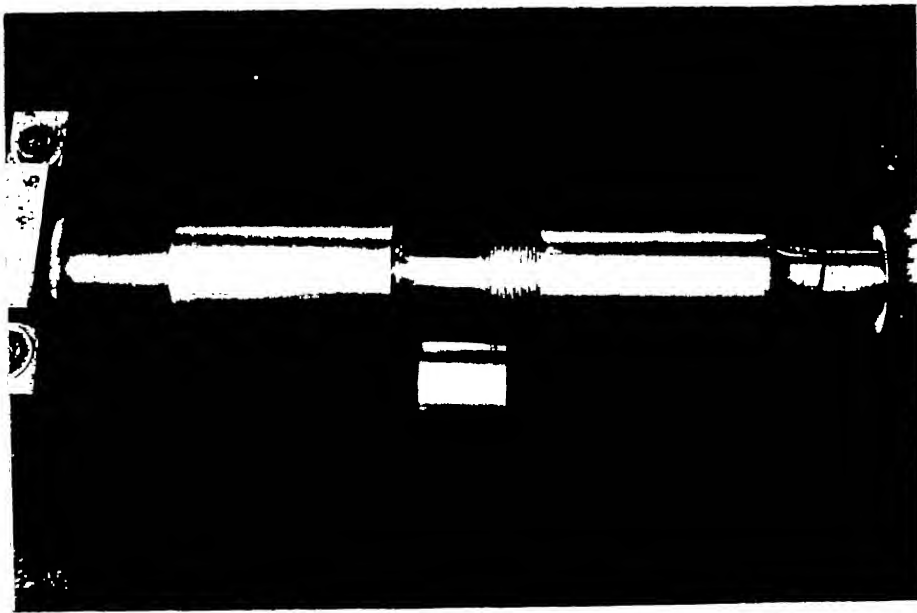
PHOTOGRAPH SHOWING A SPECIMEN, A COLLAR
